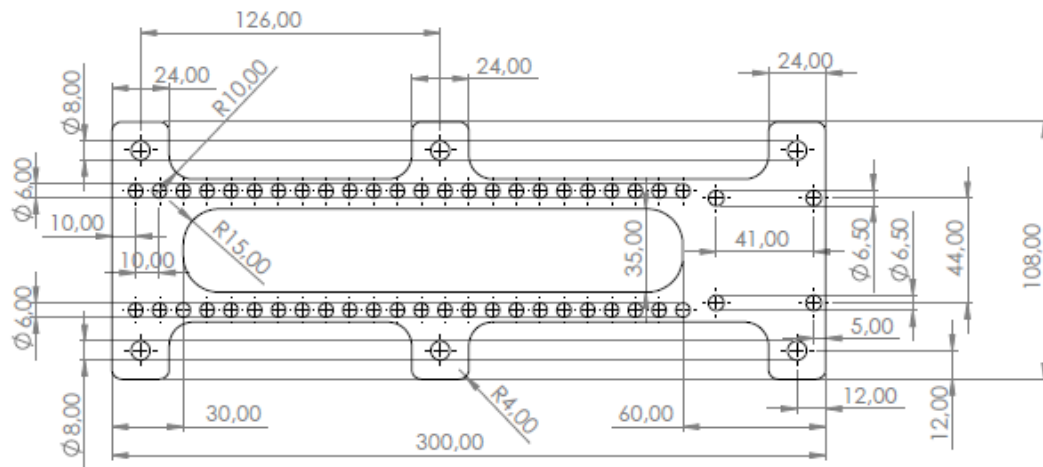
Technical drawing in mm's of the plate frame of the reactor.
